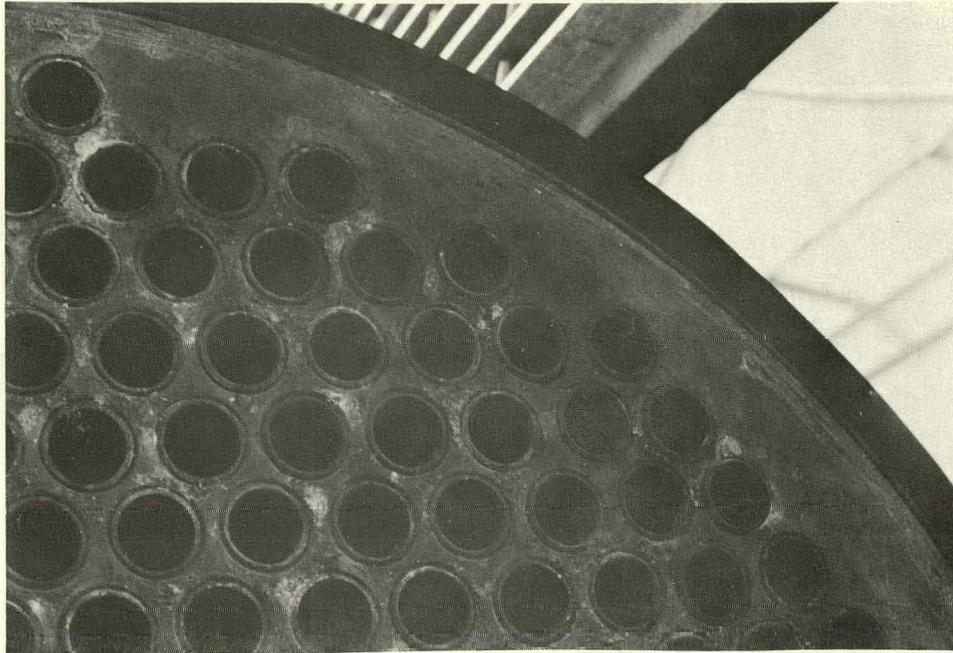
Close-up View of Heat-removal Condenser Tube Sheet Showing Pitting Corrosion. Maximum depth of attack approximately 6 mm.
